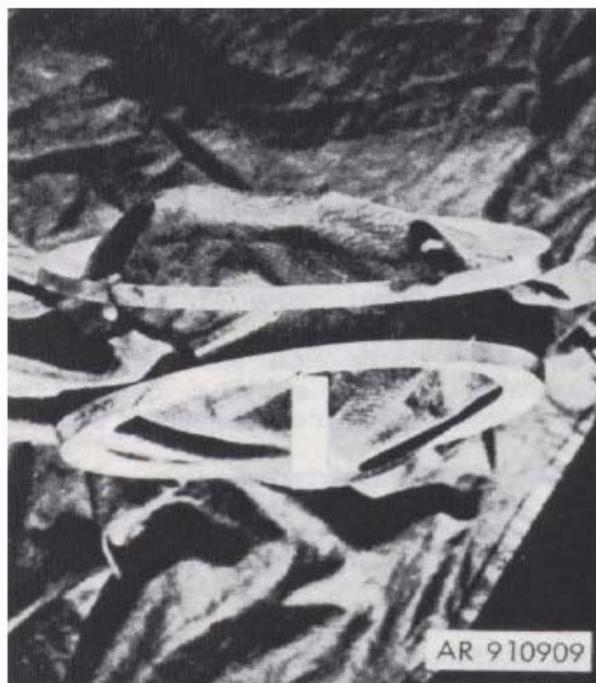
Groove cut by gas wash across gas check seat: CONDEMN.
